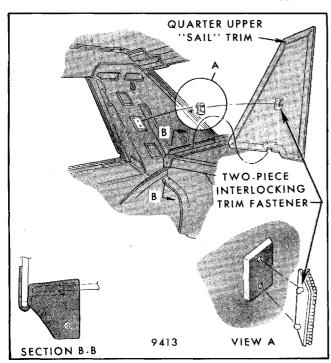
Quarter Sail Trim Attachment - B,C Coupe Styles
